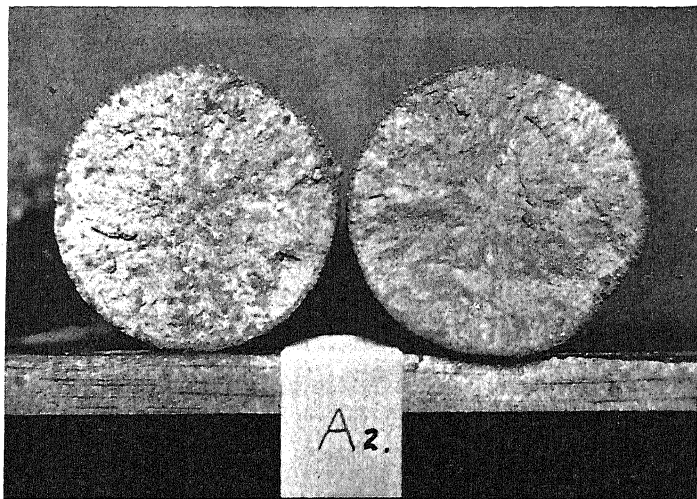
CAST-IRON TEST PLUG, SHOWING HIGH-MOTTLED AND WHITE FRACTURES.
